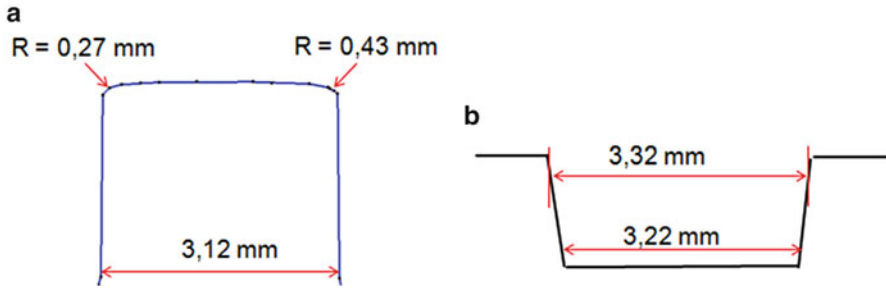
(a) Geometry of grinding wheel used for AECG machining of DDCC composite; (b) geometry of groove machined in DDCC material ($U-E = 30$ VDC, $V_f = 1$ mm/min)
